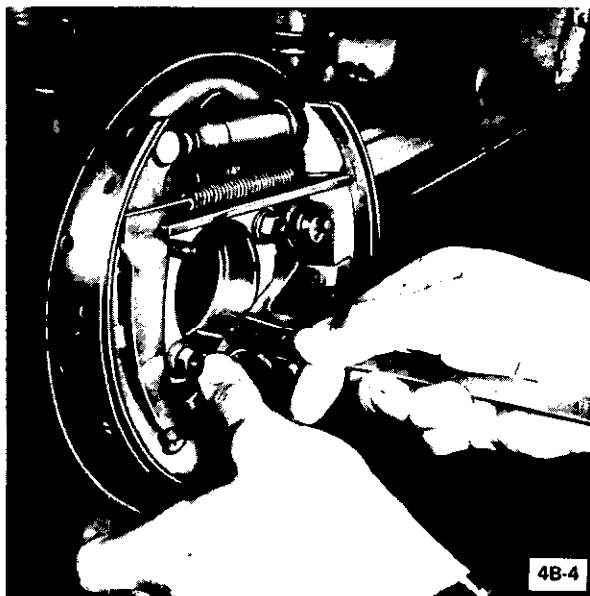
B-4 Measuring for Axle Shaft Bearing Depth
